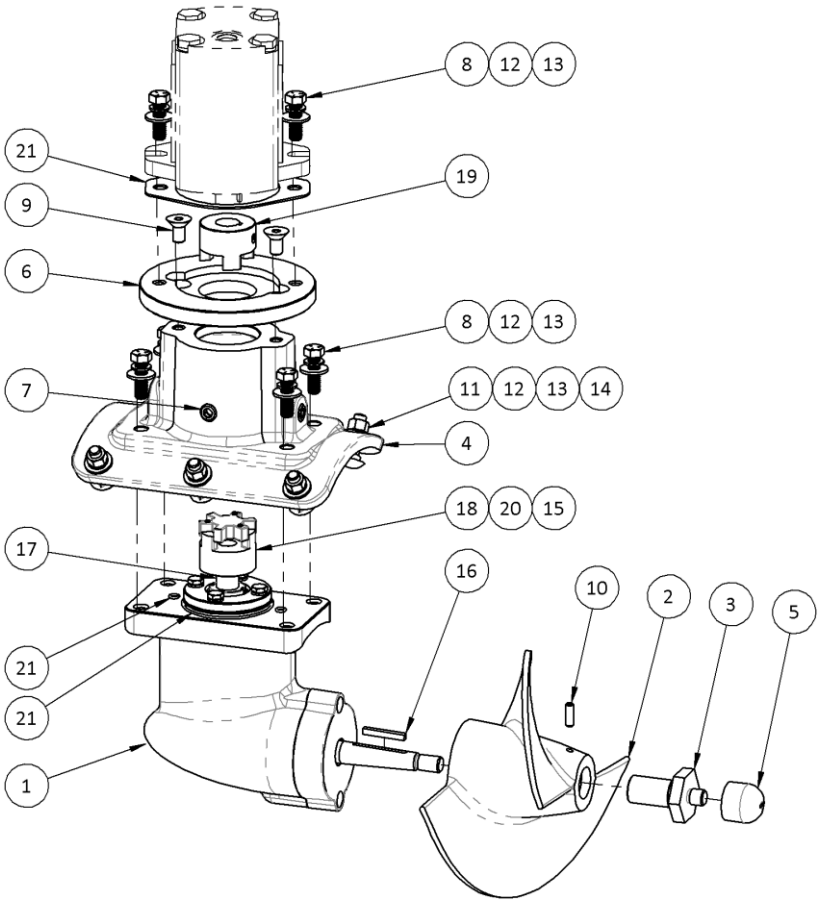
Standard KP08/KP10 Hydraulic Thruster Parts List Diagram
